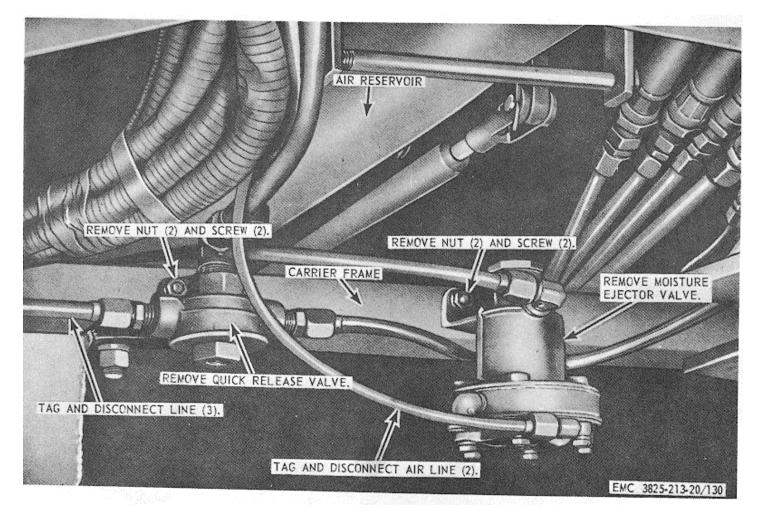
Moisture ejector and quick release valve assemblies, removal and installation.
